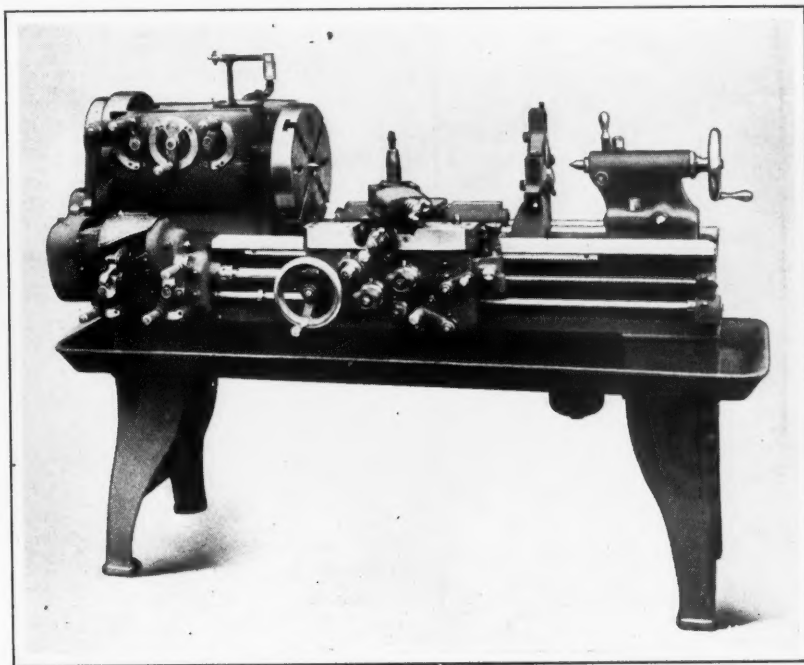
American Twelve-speed Lathe equipped with an Automatically Oiled Geared Head
